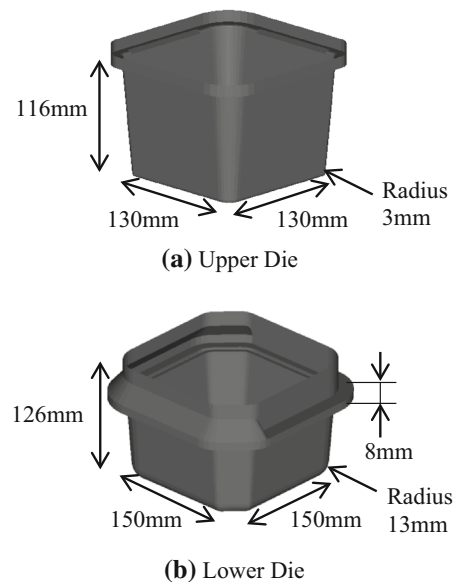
Geometry of box cavity with 16mm flange thickness. a Upper die, b lower die
